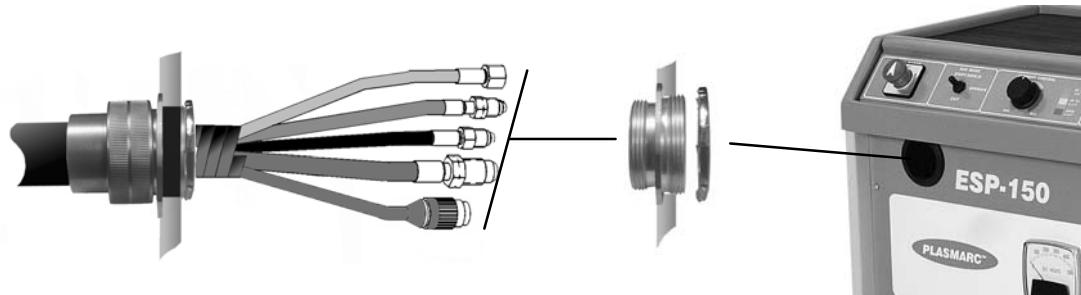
For mechanized applications using a shielded in-line torch, remove the rubber grommet slide body through sheet metal front of ESP-150 and tighten with
